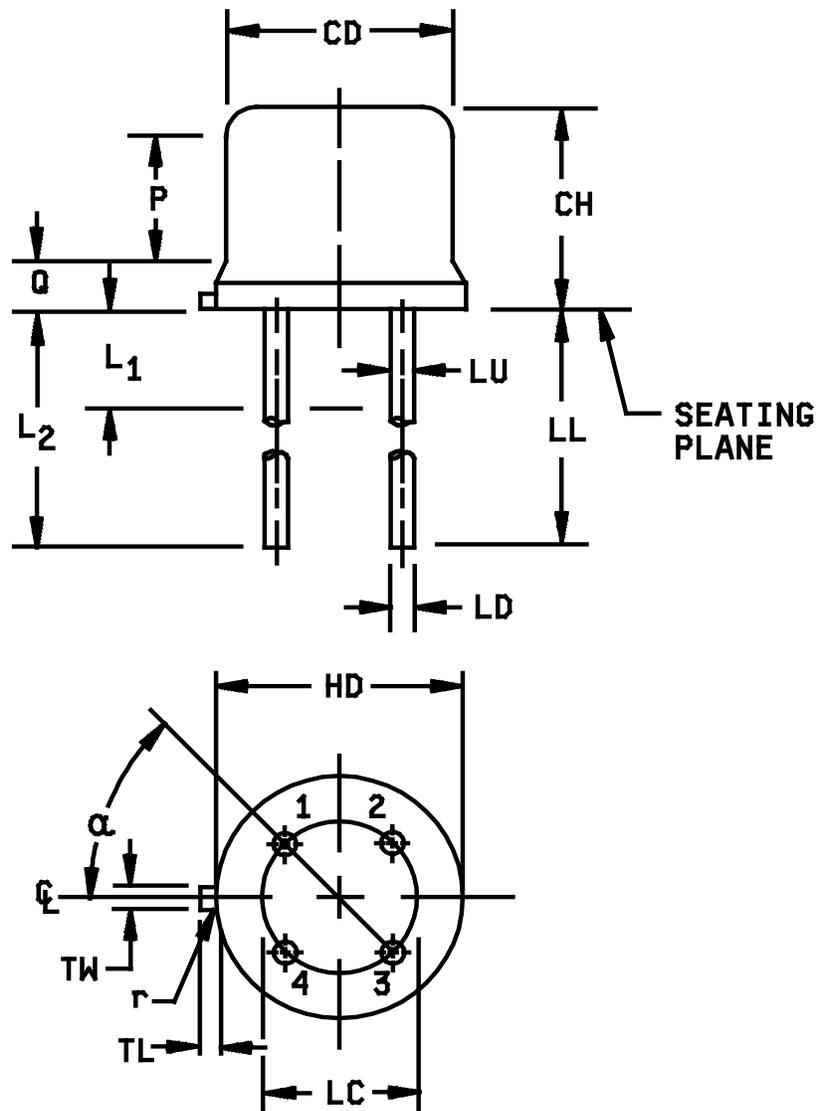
Physical dimensions of transistor type 2N4957 (TO-72).
